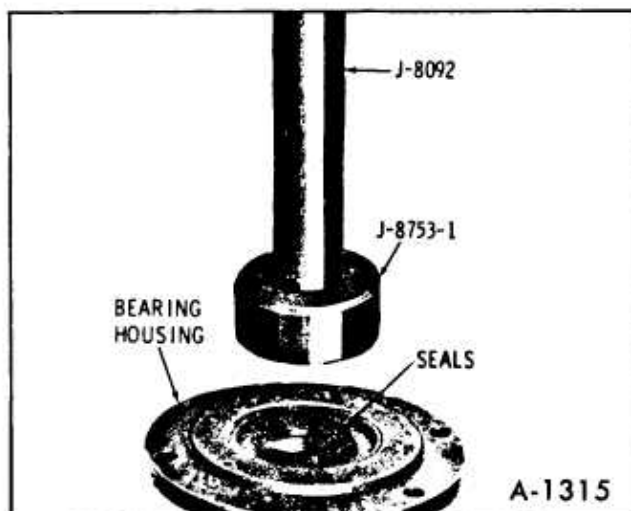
Removing Oil Seals From Pinion Bearing Housing
